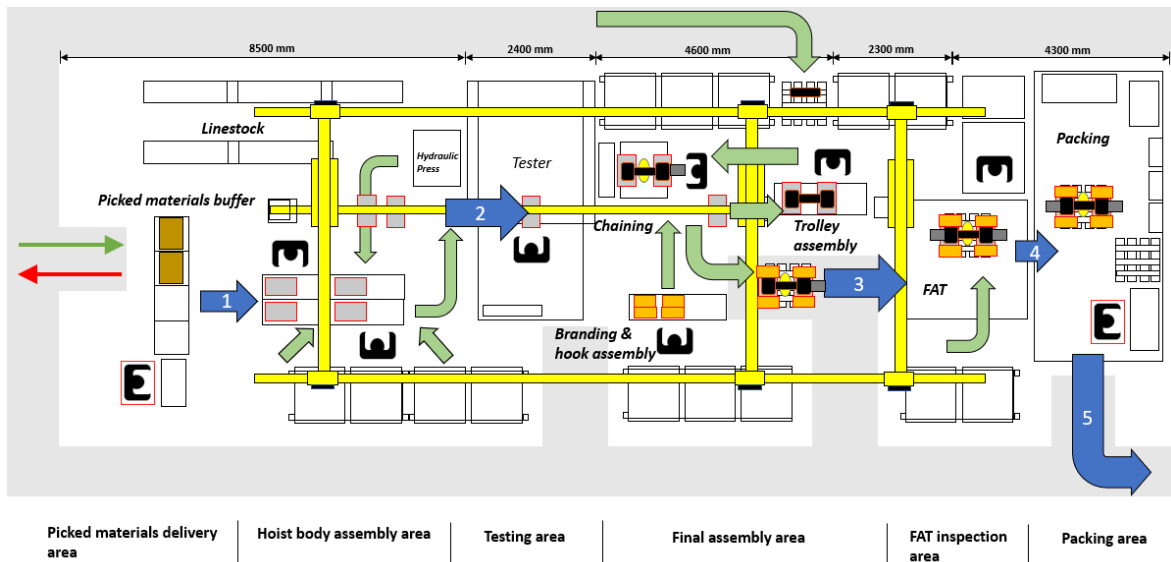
Blank paper scenario #1 assembly area layout (Special hoists)
